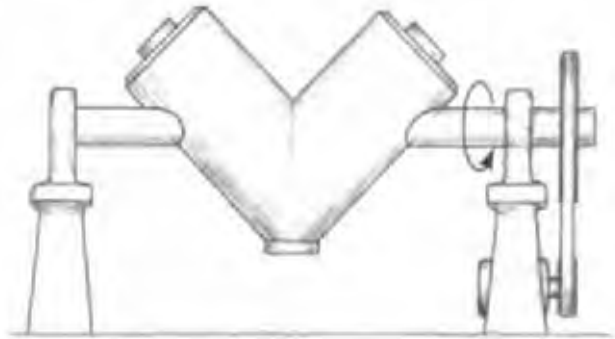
A4a Mixing by tumbling in a V-shaped barrel.
